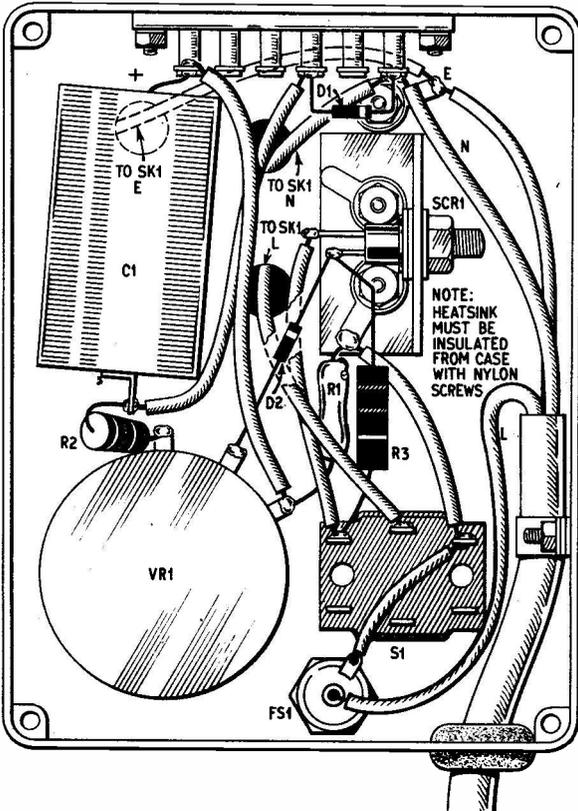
Layout of components inside the die-cast box. The fuse FS1 is only necessary when unfused (5A or 15A) plugs and sockets are used
